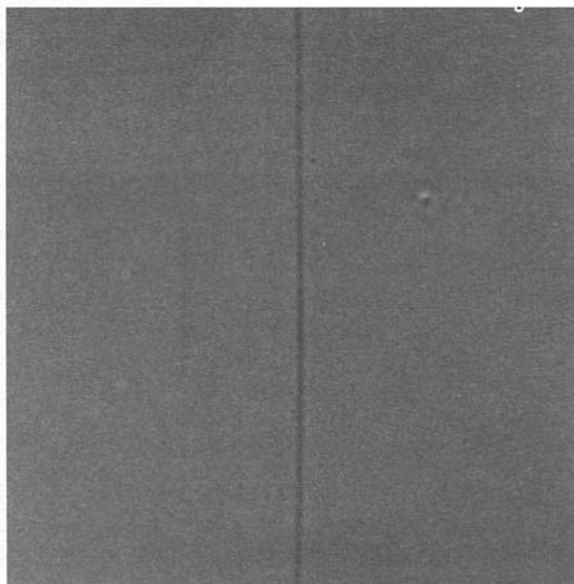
X-ray analysis of an EB weld in 1.6 mm Ti-6Al-4V sheet
